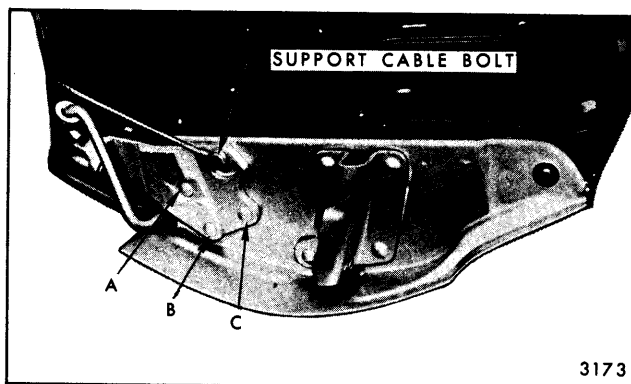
Tail Gate Left Hinge Assembly - "B" Body Shown - "A" Body Typical
